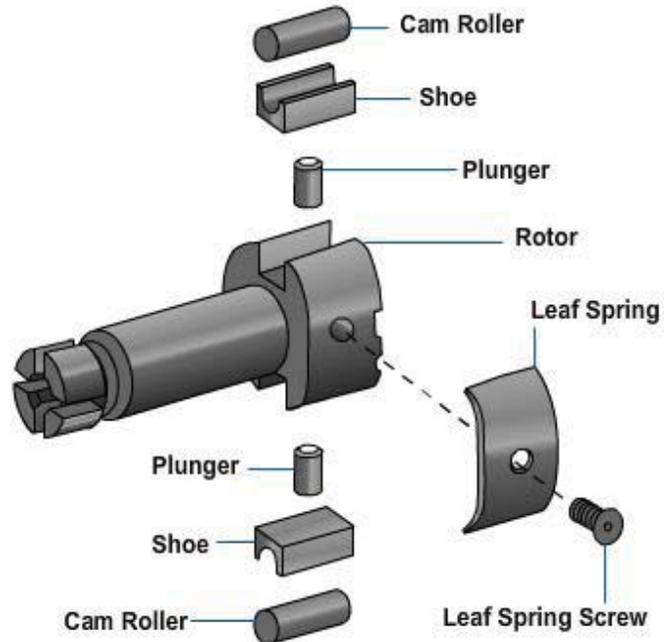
Exploded view of a rotor assembly showing the cam rollers and shoes.
